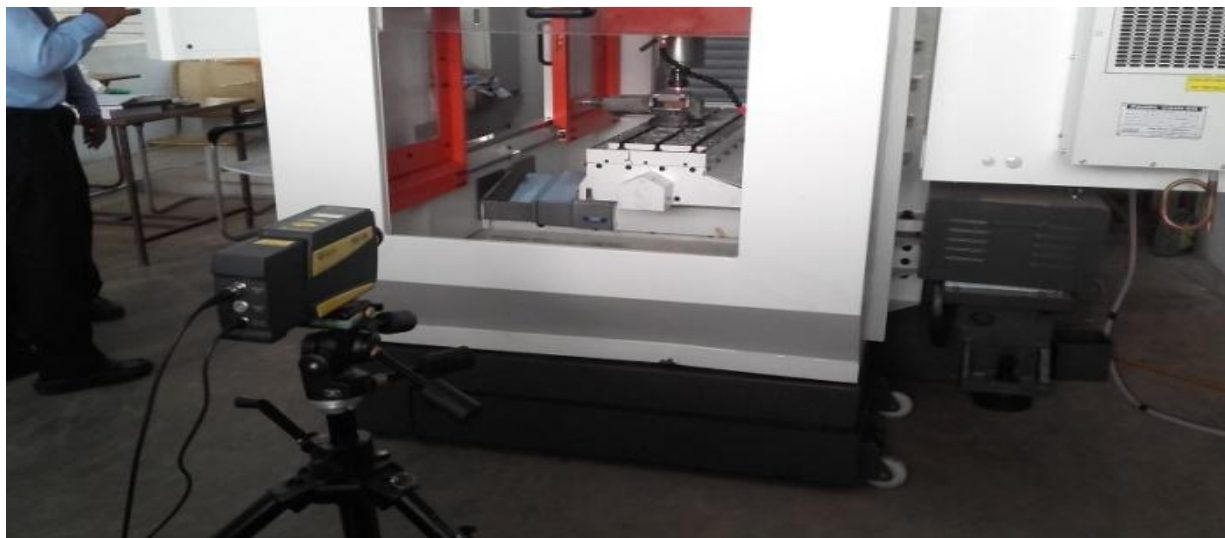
Milling cutter a) Tool holder with a work piece and Laser Doppler Vibrometer (LDV)
